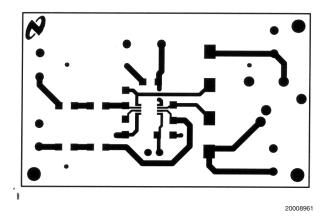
Recommended PC Board Layout Component-Side Layout
